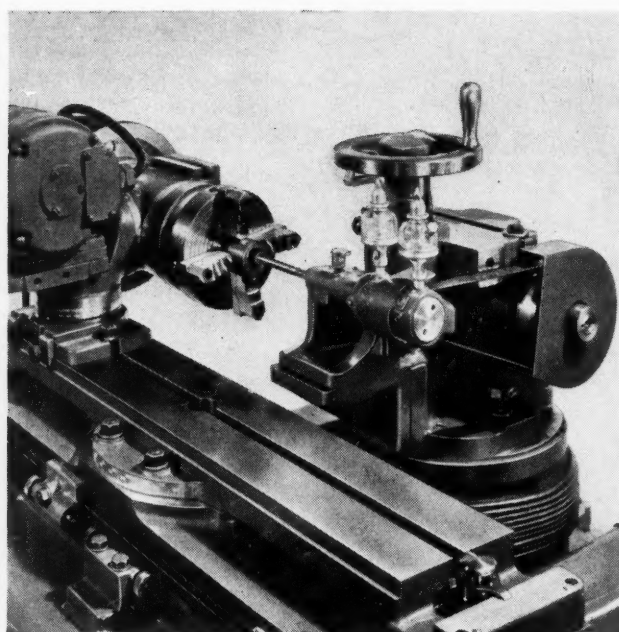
Machine shown in Fig. 1 set up for precision hole grinding, using headstock and internal grinding fixture
